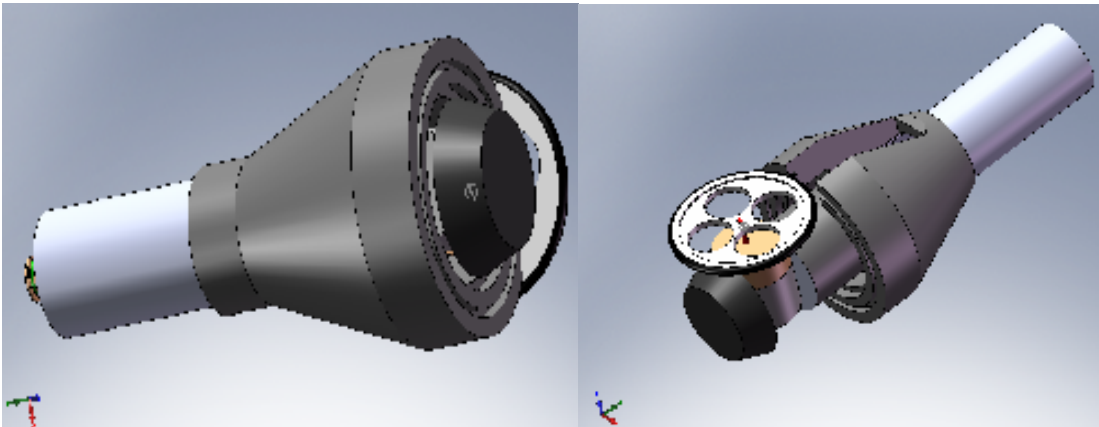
Rubber Pad and the Rubber Disk Arrangement
